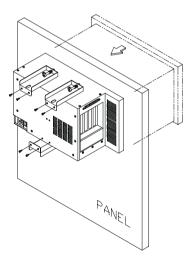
Panel mounting Cutout dimension(mm) = 325.4(W) × 210.51(H)
